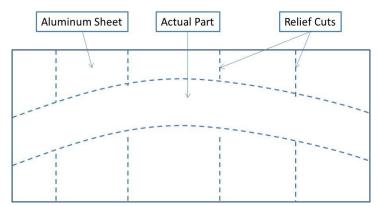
For parts with curves, relief cuts may be needed to prevent excessive bending of the band saw blade.
